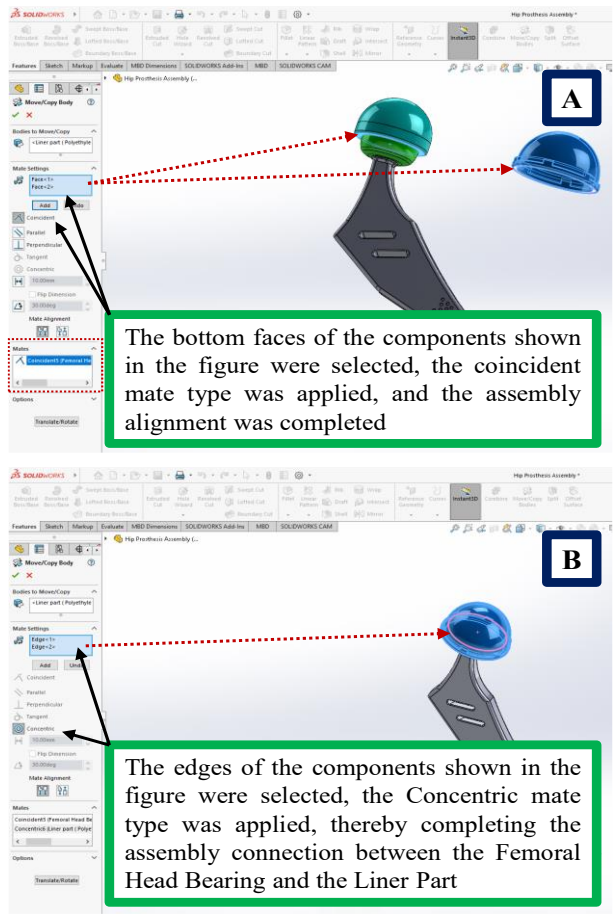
Assembly relationships between the Femoral Head Bearing and the Liner Part components
